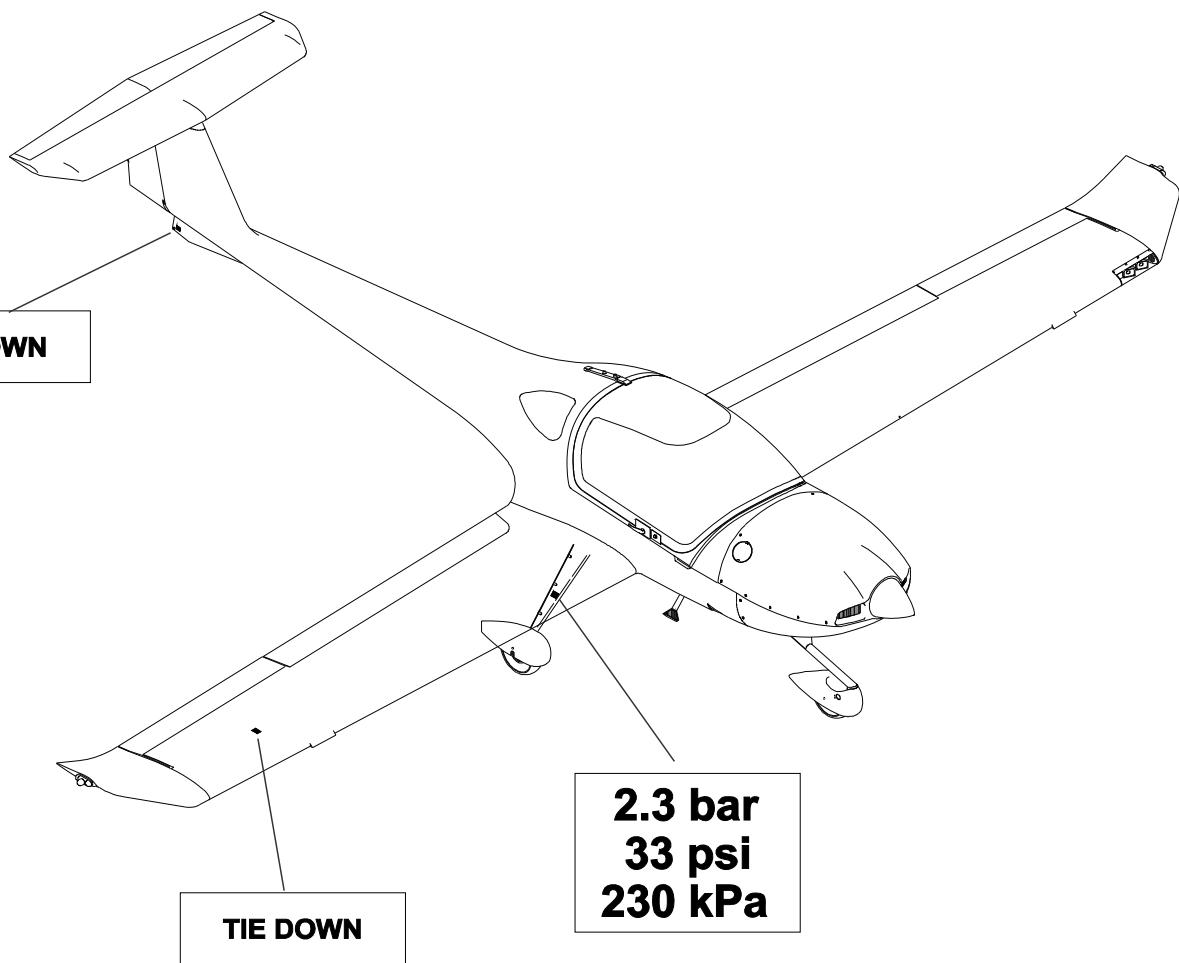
Exterior Placards - Upper Surfaces (Sheet 2 of 2)
